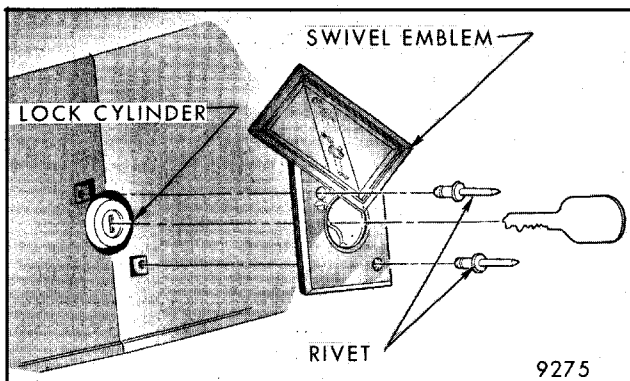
Typical Swivel Emblem - Rivet Retained - Oldsmobile "C" Style Shown
